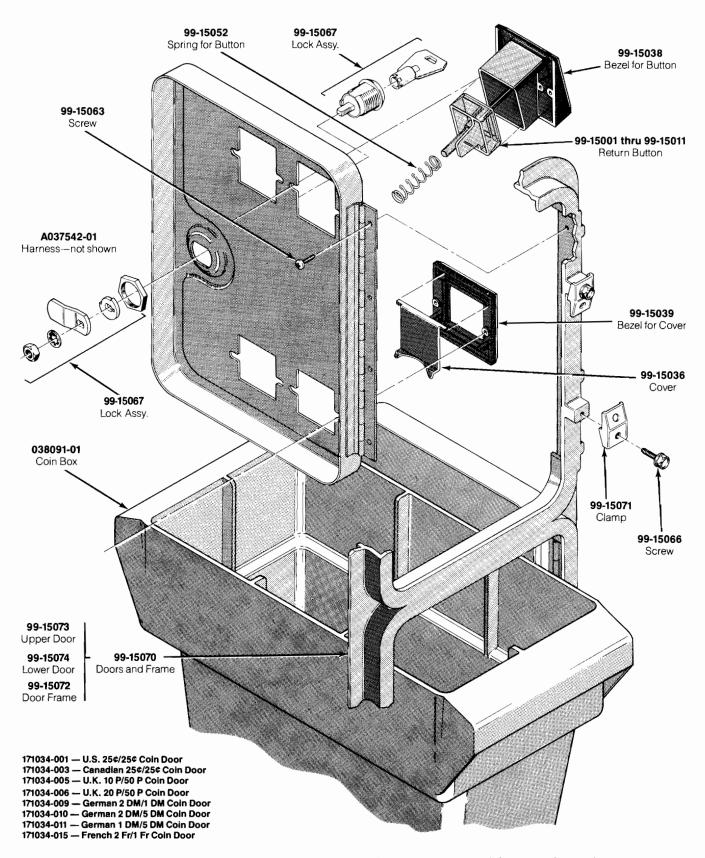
Coin Controls, Inc. Coin Door Assembly, continued 171034-xxx A
